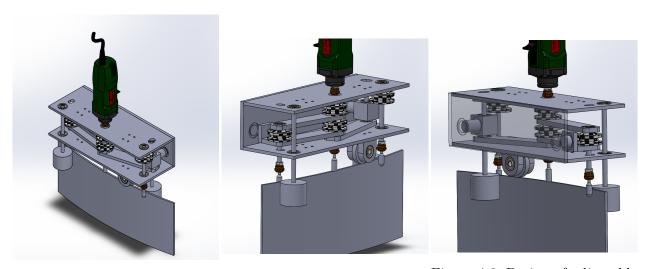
Design of the ad-Figure 4.5: Design of adjustable Figure 4.6: Design of adjustable justable gearbox with Metabo gearbox gearbox
